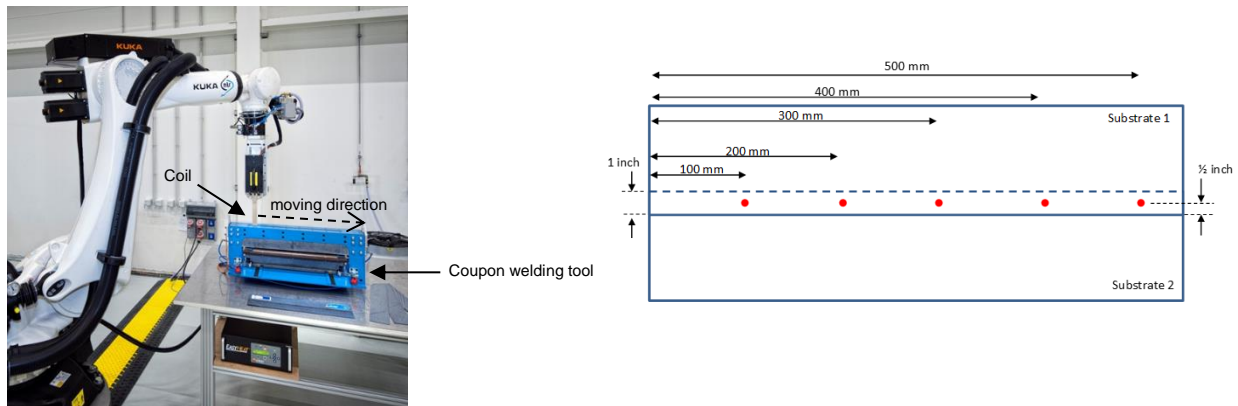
Standardized induction welding setup at NLR, Coupon welding of 2 substrates with 1" overlap (right)
